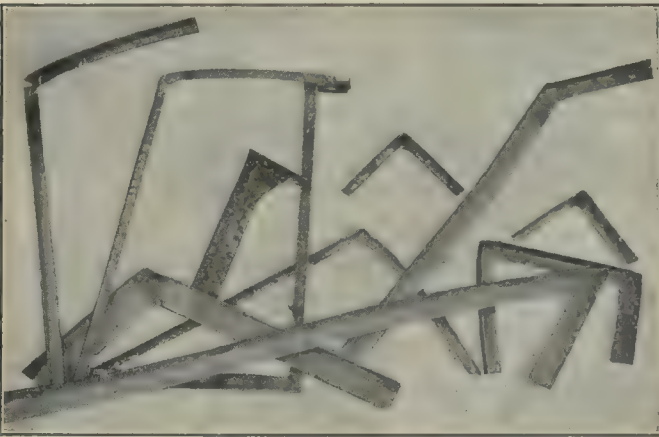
A FEW OF THE WELDED SHIP ANGLES
